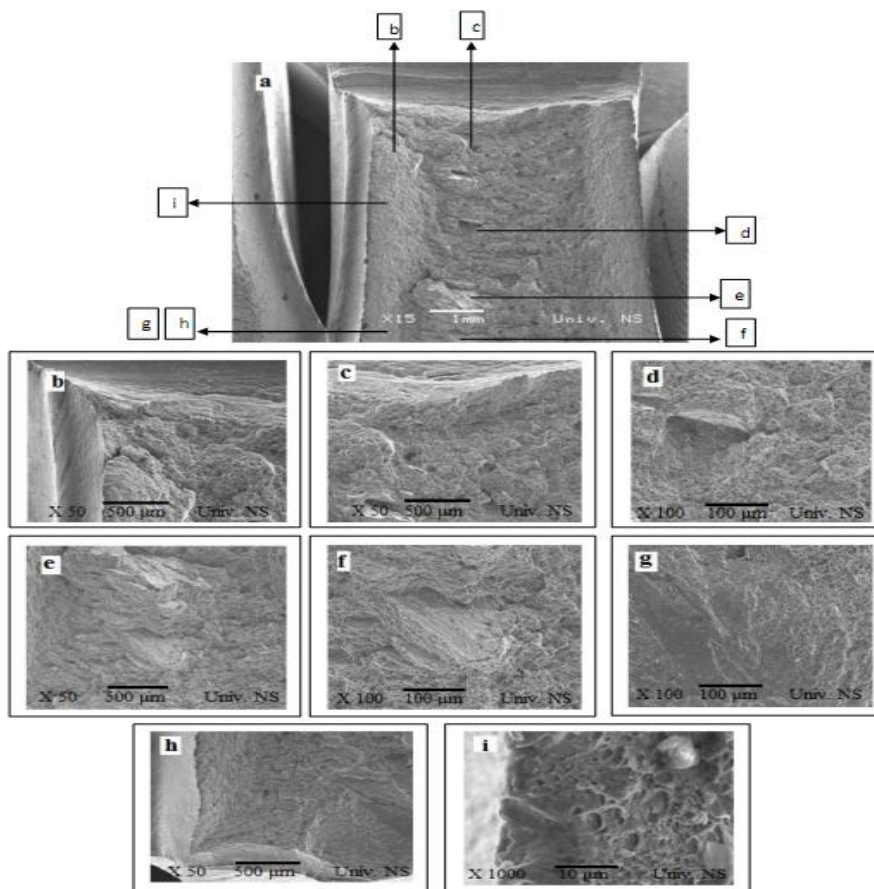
15 (a-i). SEM examinations of impact fractured specimen. Friction stir welding con-ditions: rotational speed 600 rpm, welding speed 75 mm/min and tool-tilt angle 10.
